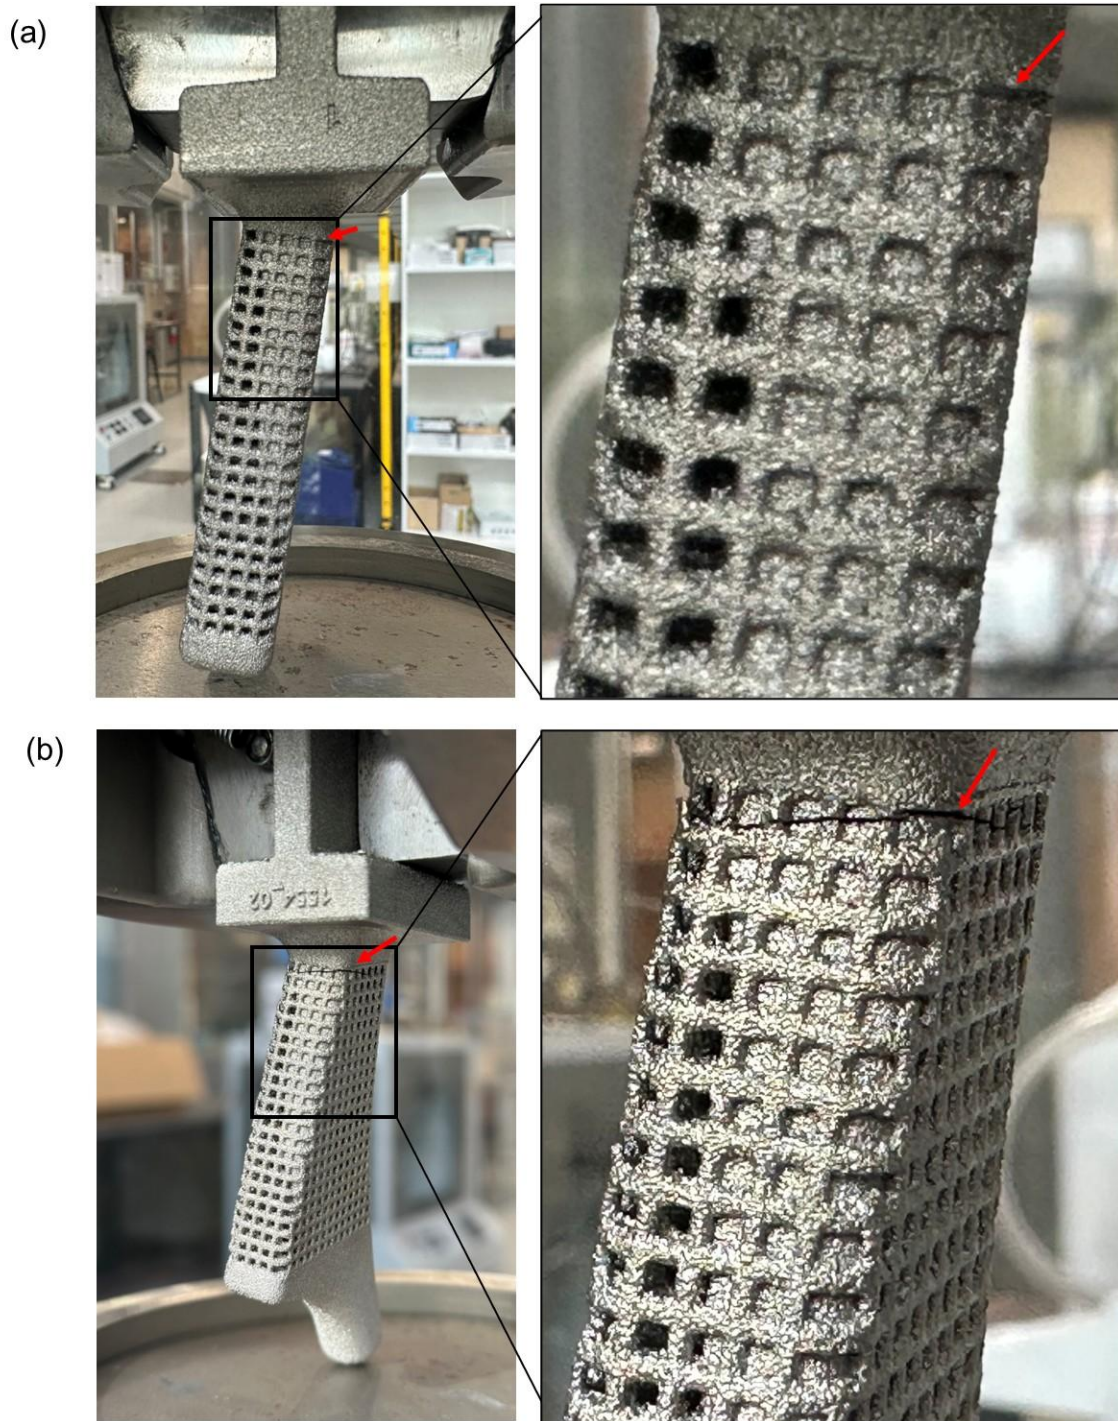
Failed specimens (a) SR-L-1 (b) SR-L-4 during the fatigue tests (the red arrows point to the cracks)
